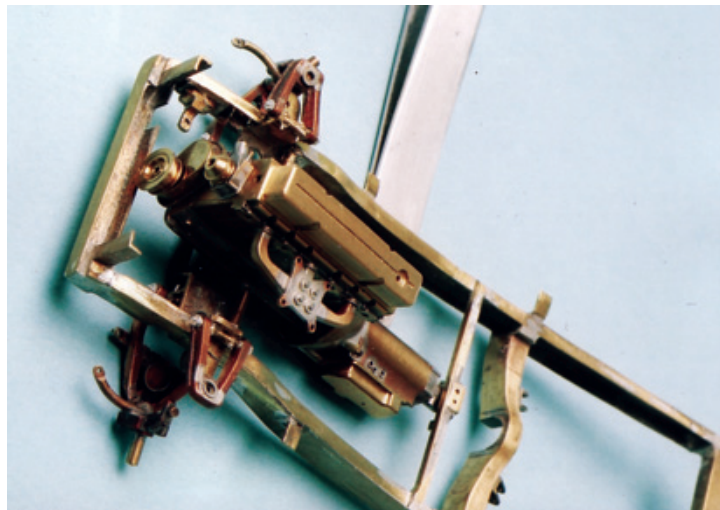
Cody Grayland machined the upper and lower control arms (complete with the bosses through which the mounting bolts are run) and the bolts that locate the control arm in the upper A-frame. The control arms are attached almost exactly as if they were 1:1 parts: the bushing slips over the shafts, which have been placed within the concentric “holes” through the pivot points in the upper and lower arms. The upper control arm bushing setup is comprised of five parts, as are the lower control arms.
